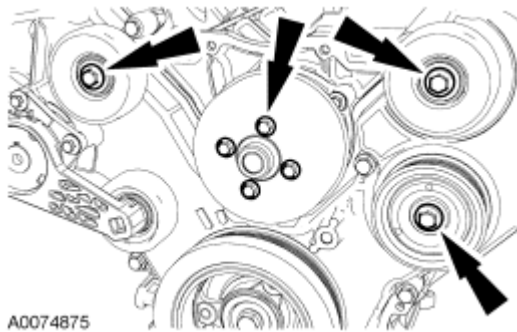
Locating Coolant Pump Pulley And Accessory Drive Belt Idler Pulley Bolts
